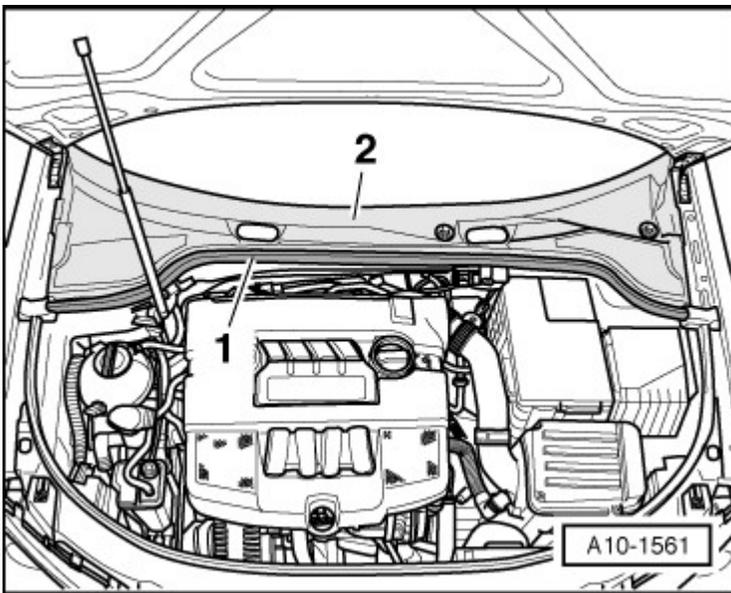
Identifying Plenum Chamber Cover And Rubber Seal
